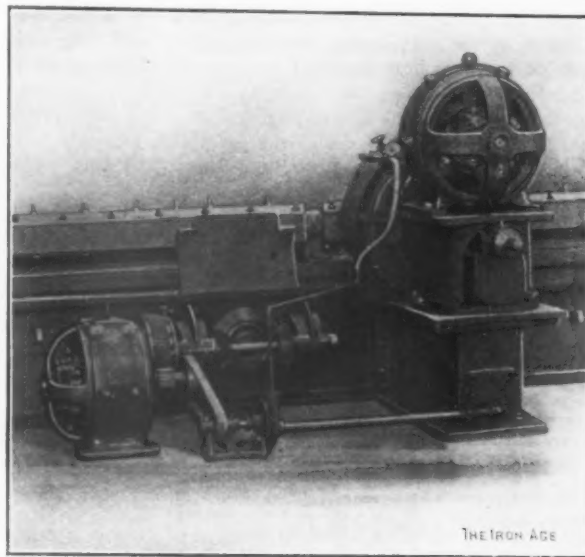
A Rear View of the New Bridgeport Knife Grinder, Showing the Two Driving Motors.
